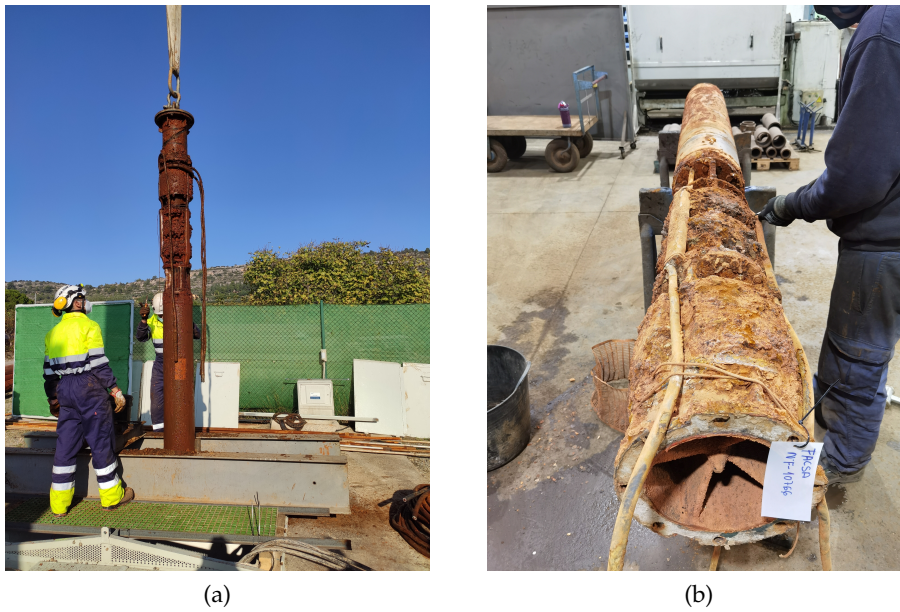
Motor being removed (a) and sent for inspection (b).
